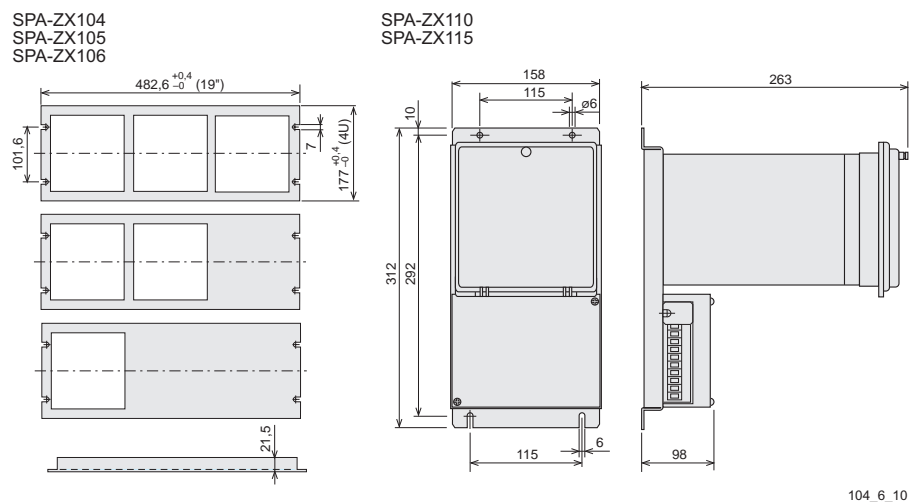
Mounting cabinets and frames as well as projecting mounting (dimensions in mm)
